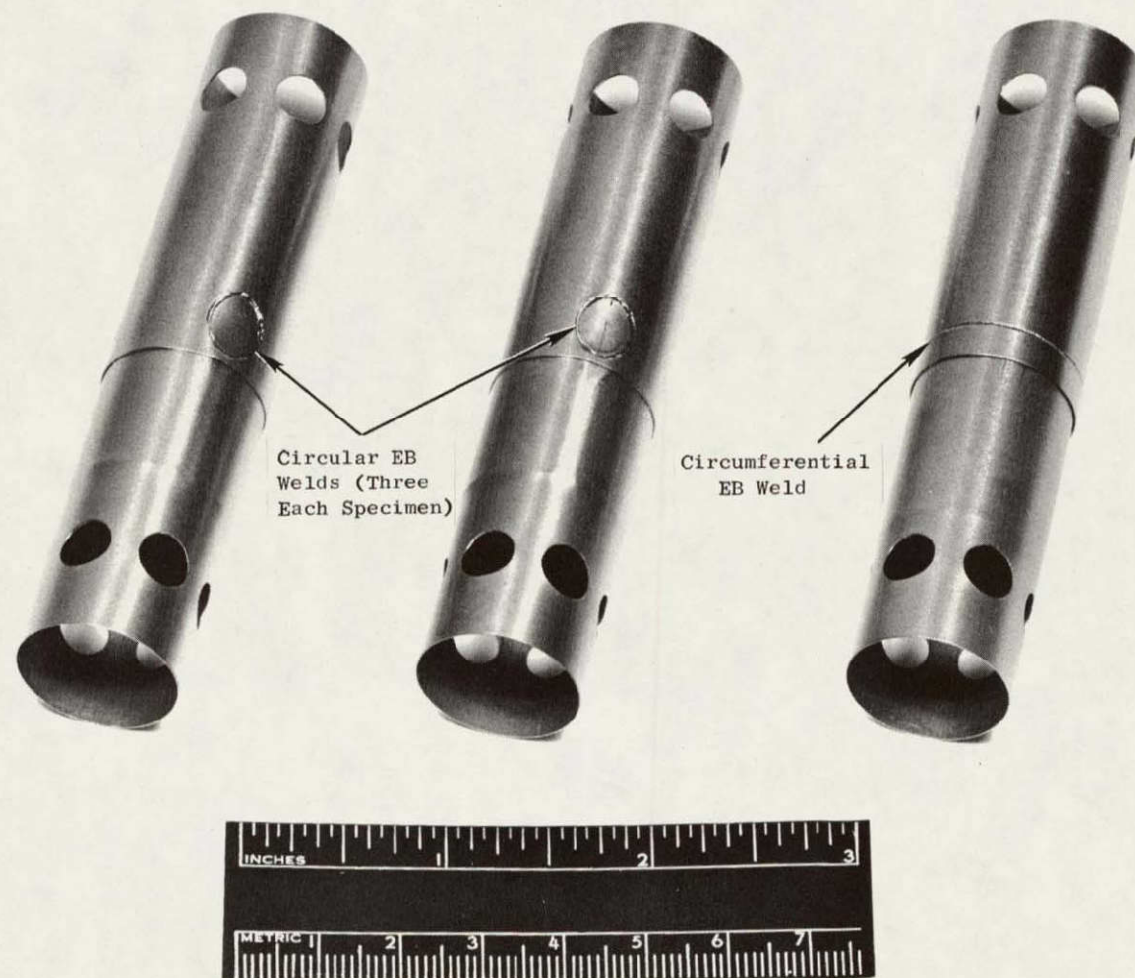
T-111 Tube Insert-to-Tube EB Weld Specimen for Mechanical Properties Testing - Before Test. (70-4-3R)
